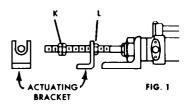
The Hydro-Check is mounted to a frame or other non-moving member of the machine to be controlled. An actuating bracket, drilled or slotted to clear Hydro-Check piston rod, is mounted between moving machine element and Hydro-Check piston rod, as shown.
